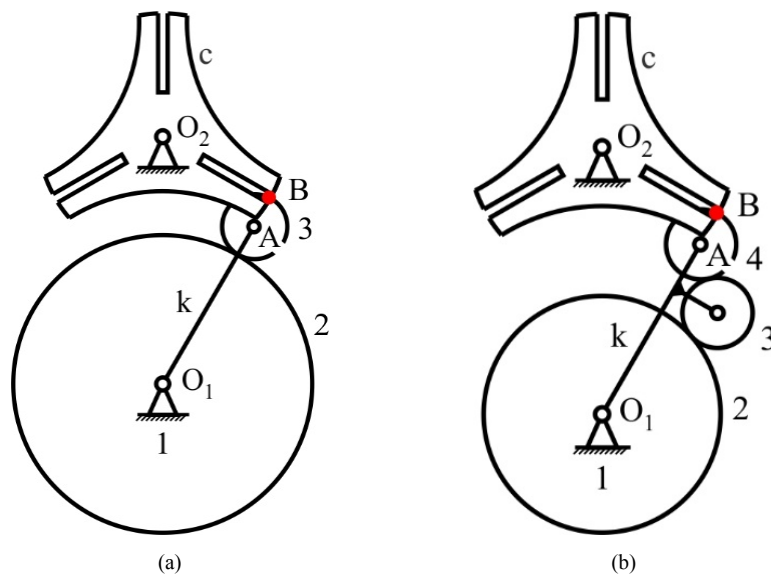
Modified Geneva mechanism: (a) with one planet gear and (b) with two planet gears
